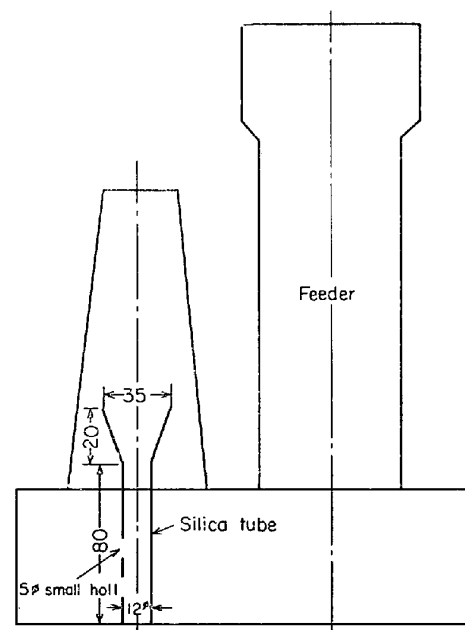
Geometry of hot bottom ingot with silica tube (mm).
